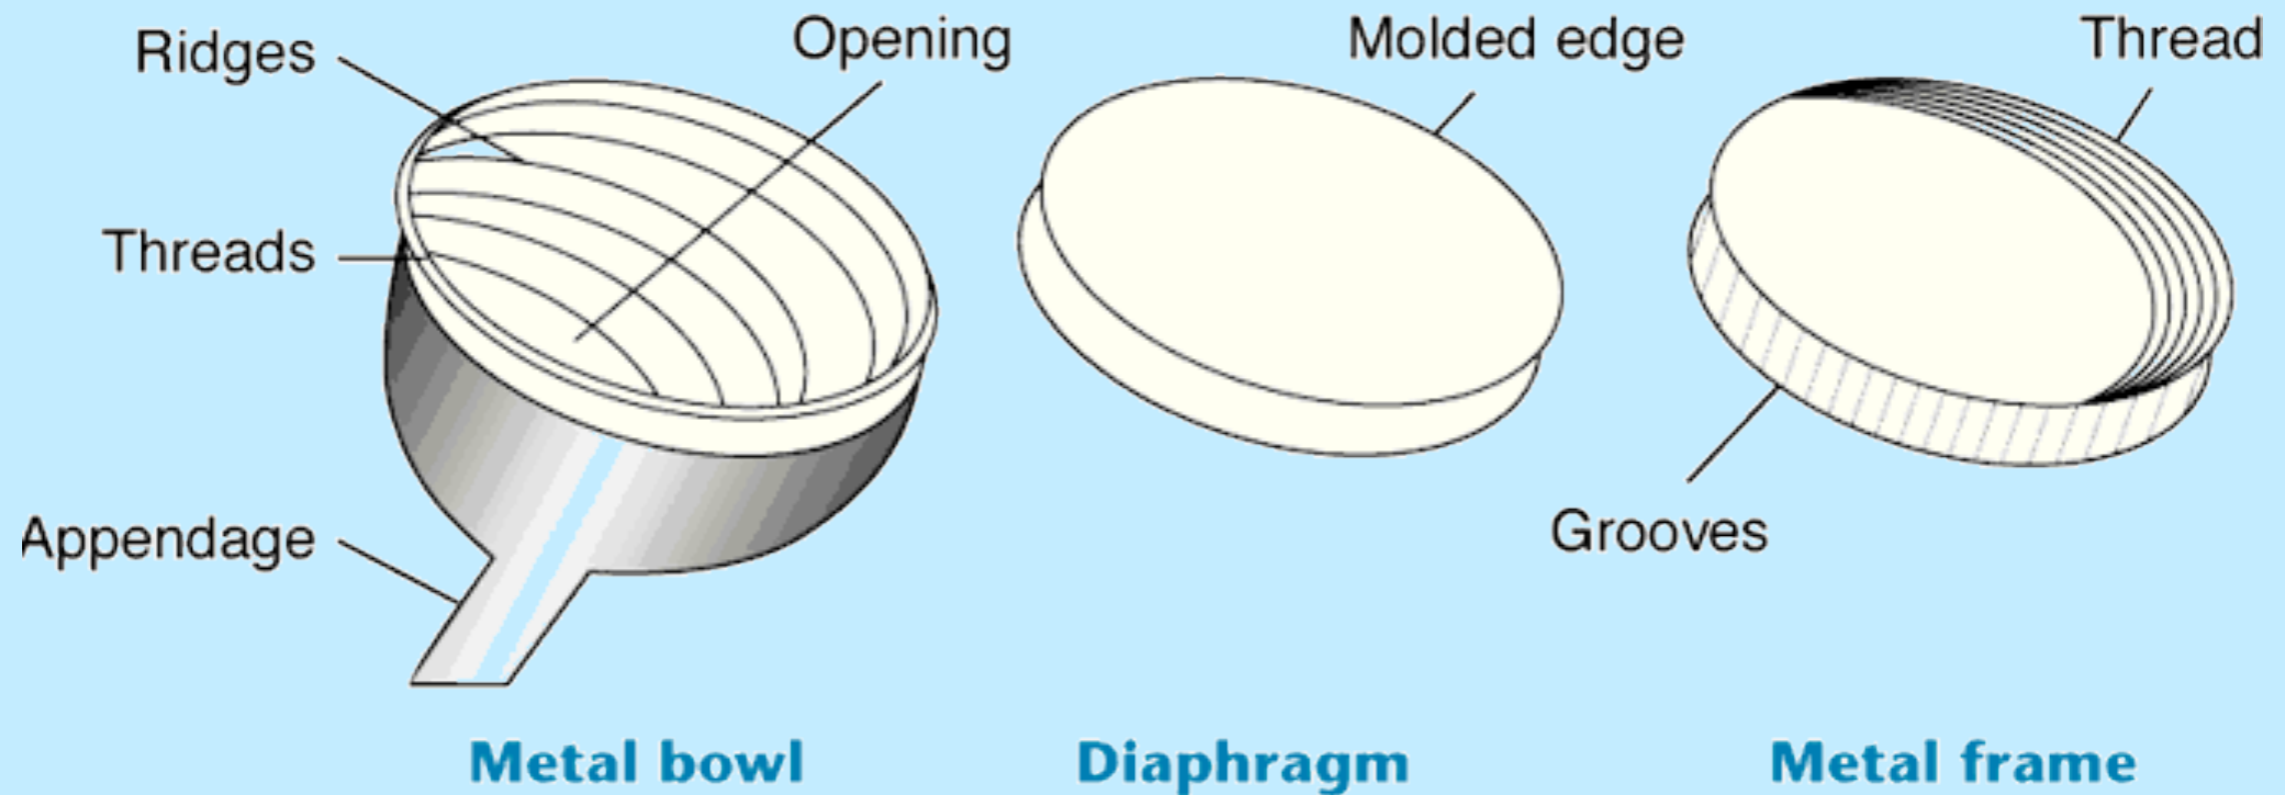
Exploded View of a Diaphragm Contact Piece
